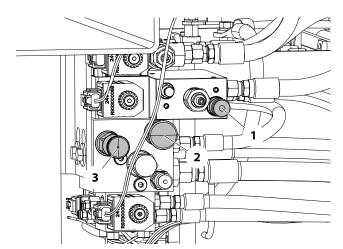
Hydraulic Brakes - Manual Disengage (Inside Right Side Compartment Door)
